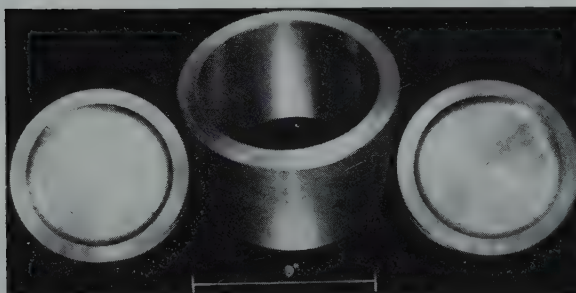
Photograph showing a cylindrical casting and end plates to form a small ball mill approximately 8 in. od.
